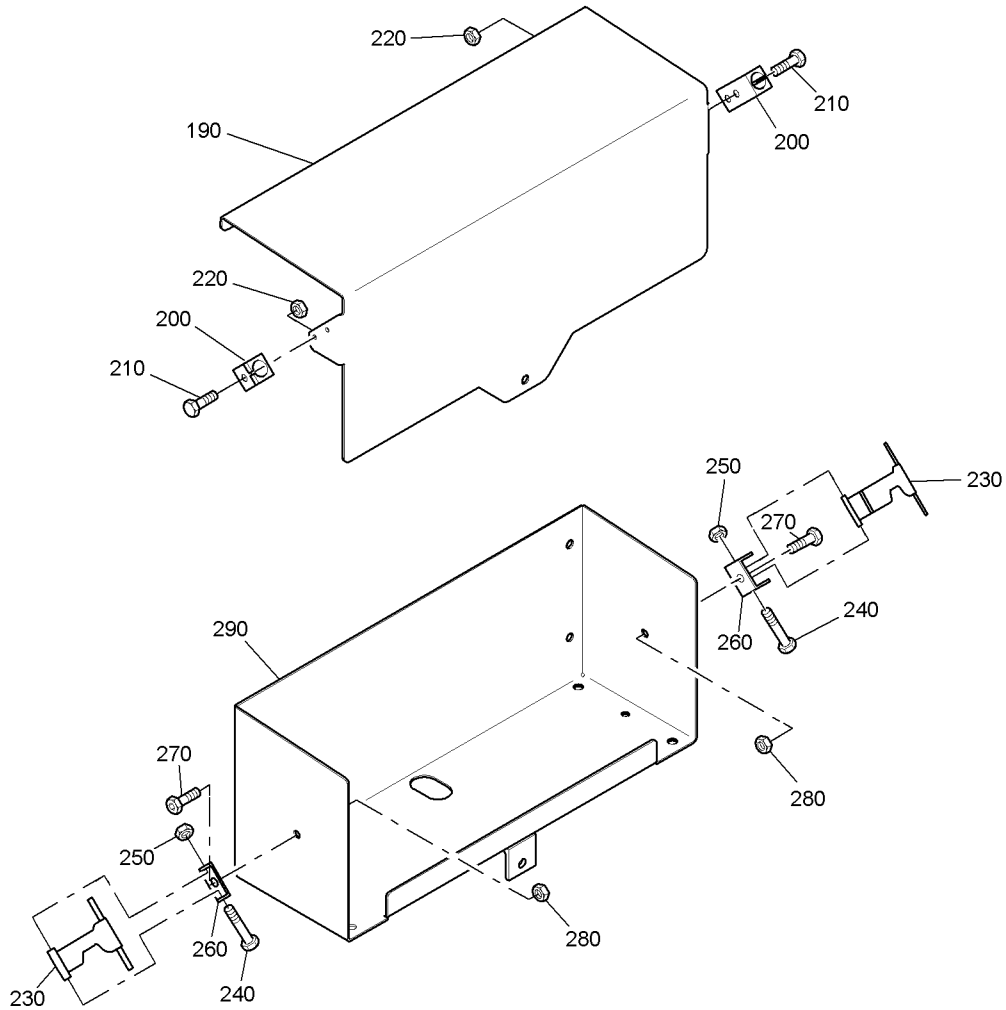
BATTERY BOX AND TOOL BOX ASSEMBLIES (SHEET 2 OF 2)
